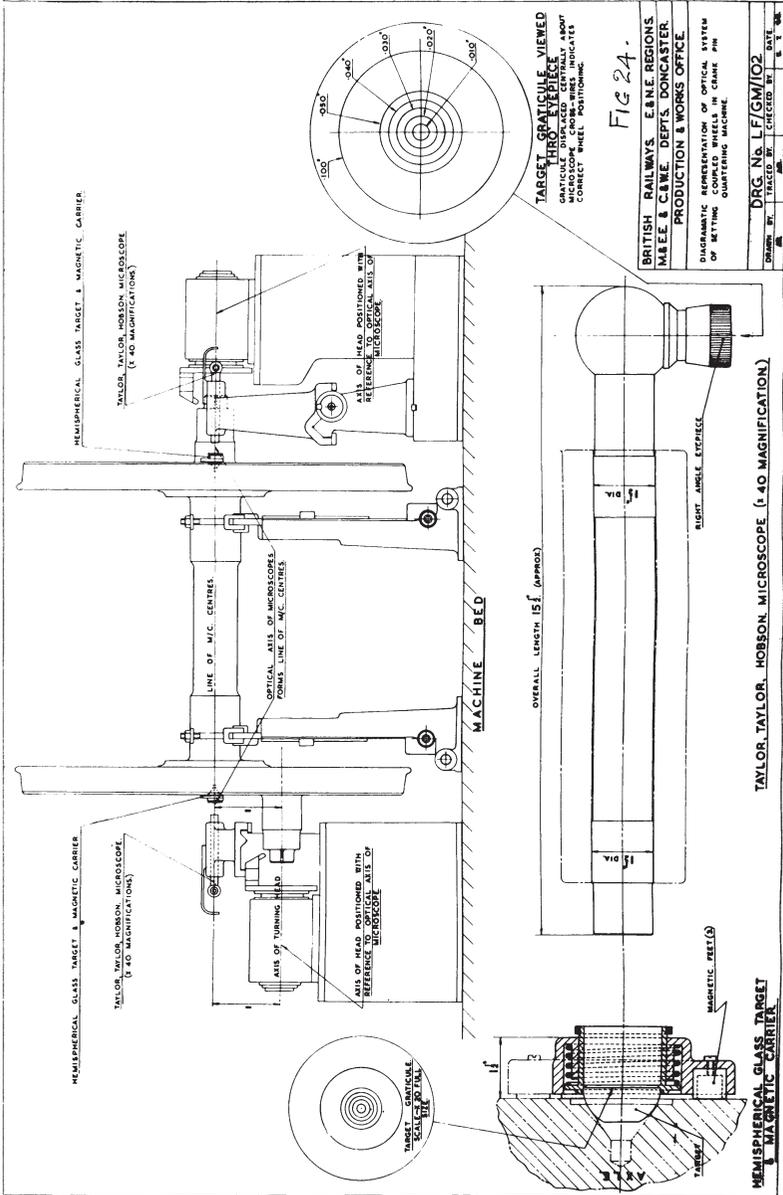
Diagrammatic representation of optical system of setting coupled wheels in crank pin quartering machine.
